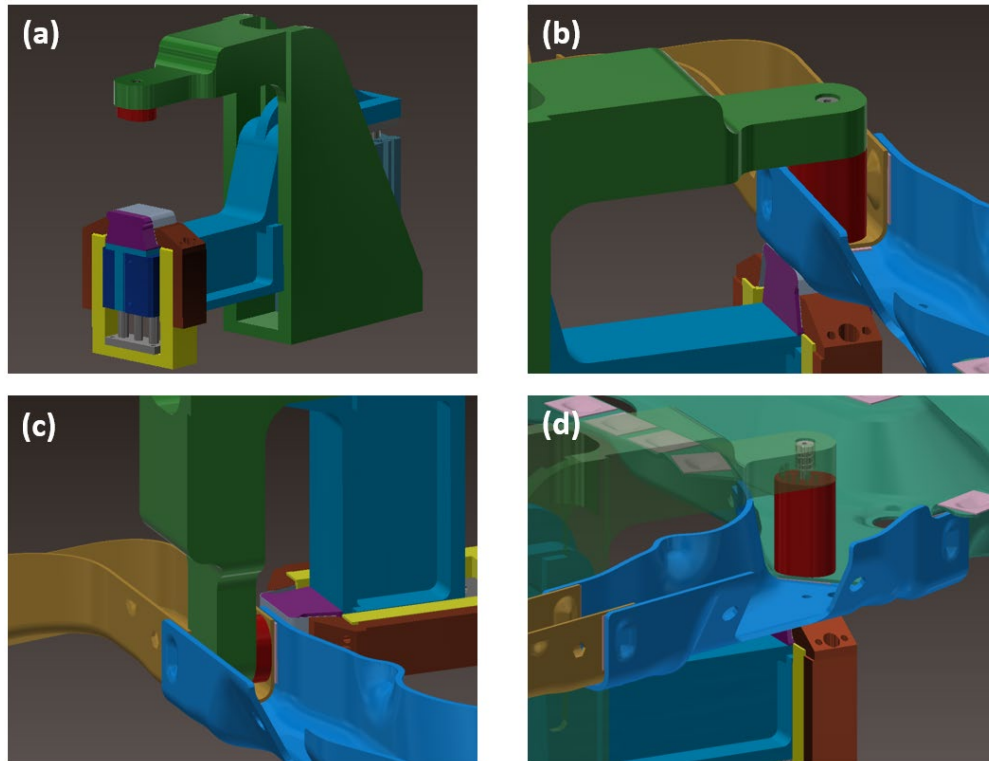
F.9. Design of the weld head: (a) weld head in open position; (b) part clamped with long anvil; (c) part clamped with short anvil; and (d) part clamped with adjusted-angle anvil. Source: OSU.
